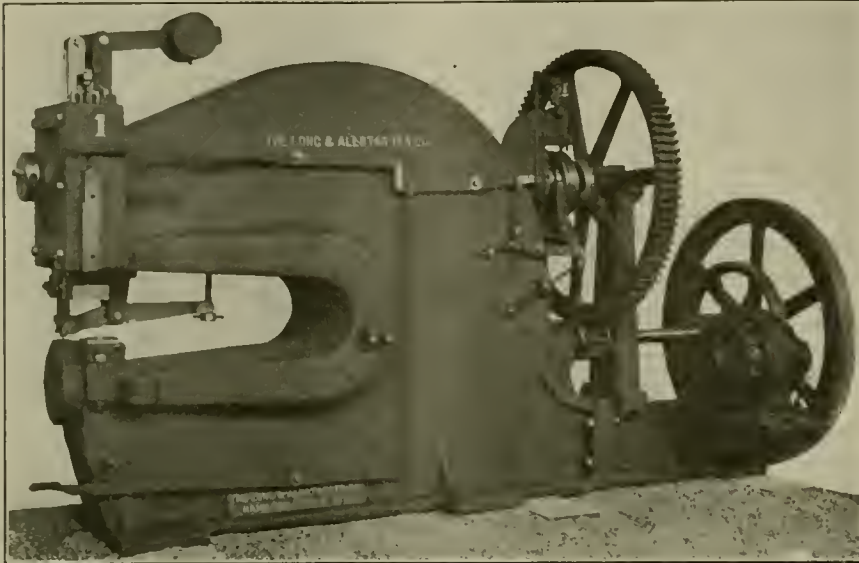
SINGLE PUNCHING AND SHEARING MACHINE.
